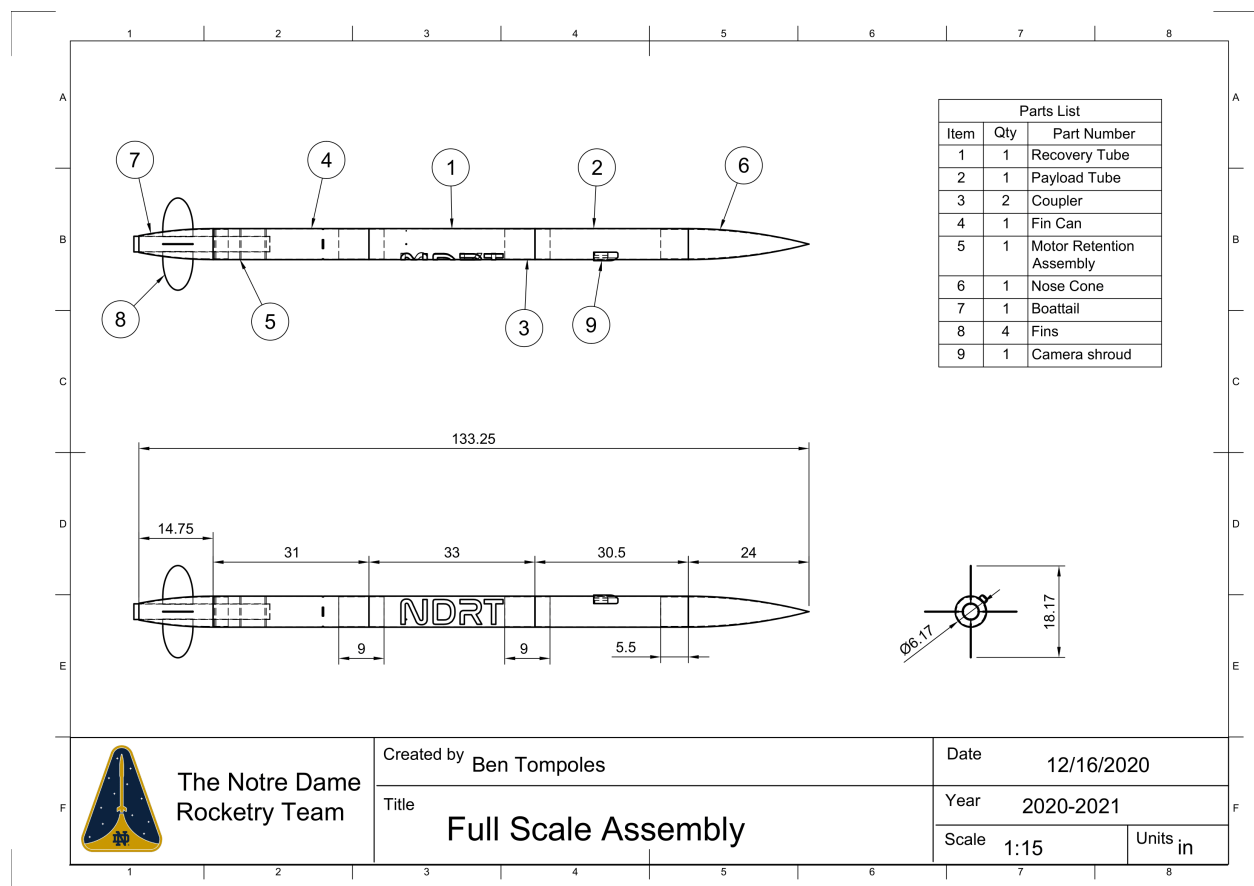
CAD drawing of the launch vehicle design with component labels and overall dimensions
